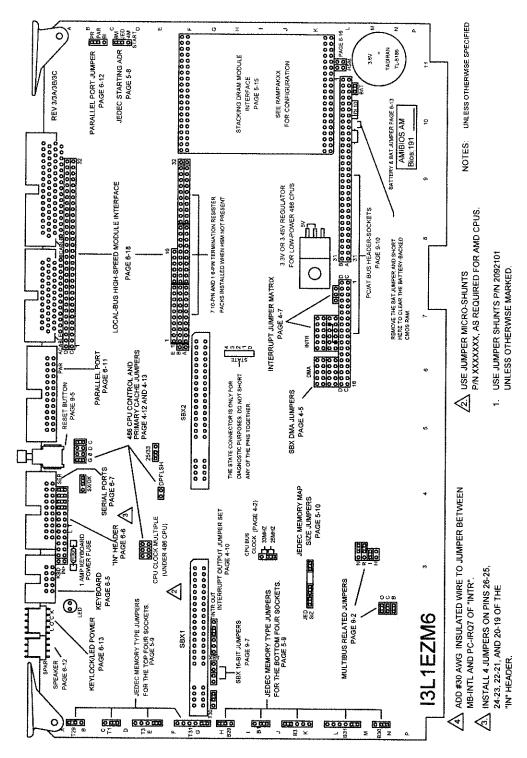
Marking Engine MAT486 Board-Jumper and Switch Configuration
